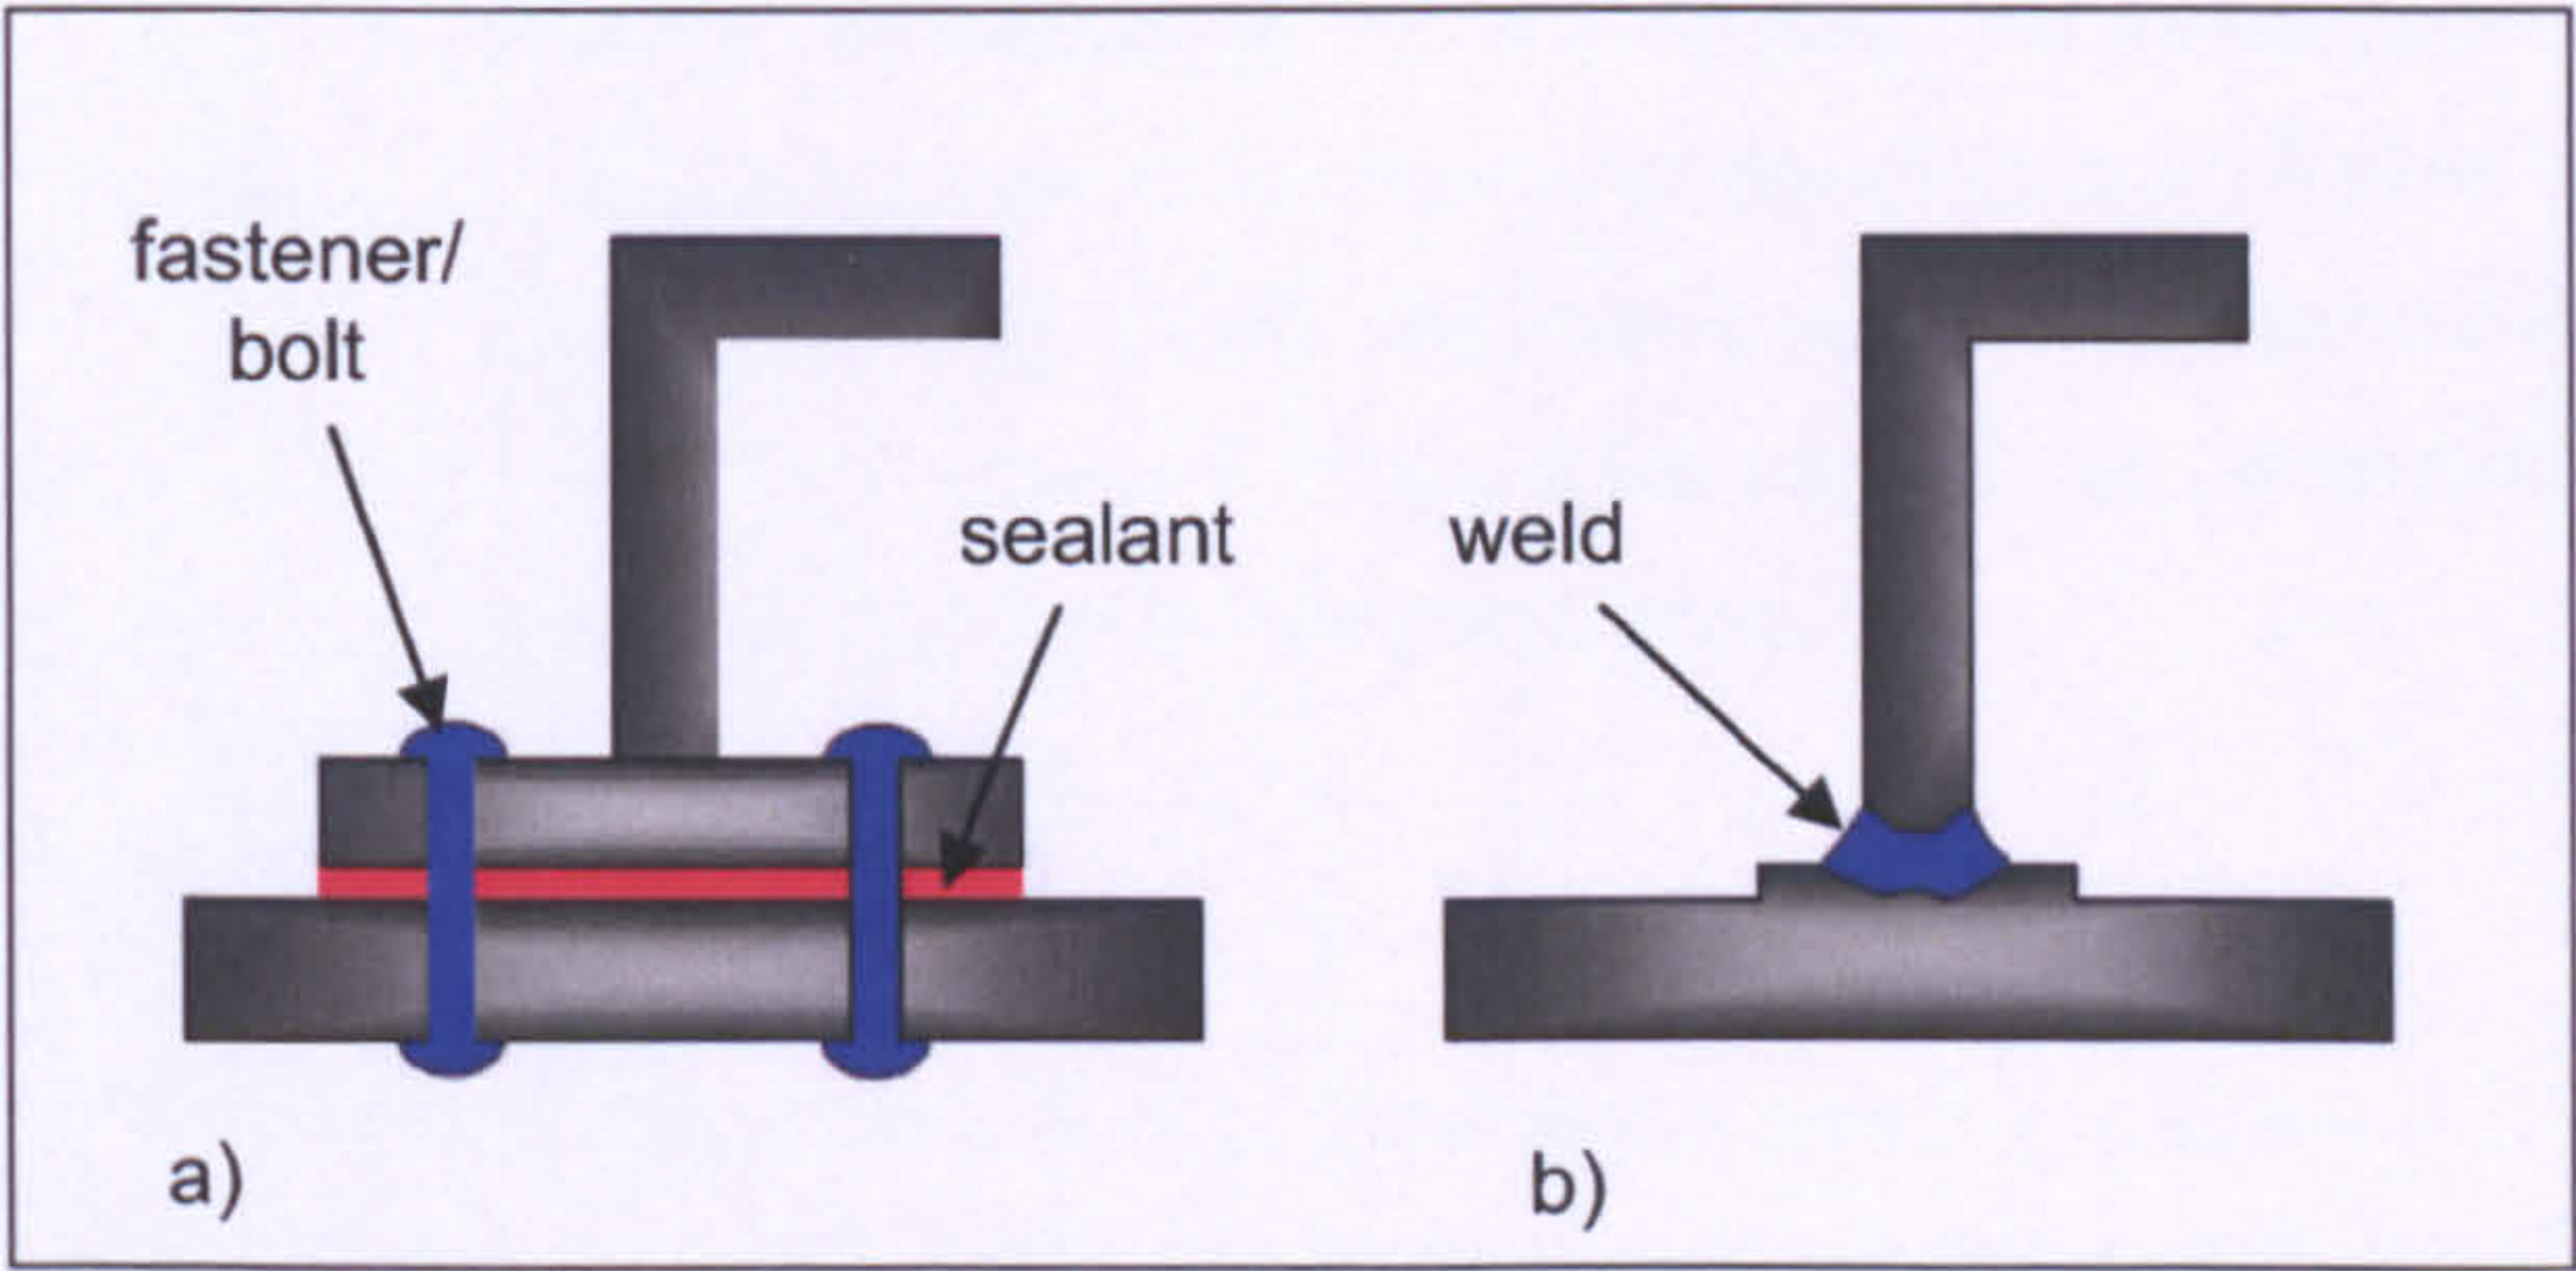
Fastened/bolted joint (a); welded joint (b)
